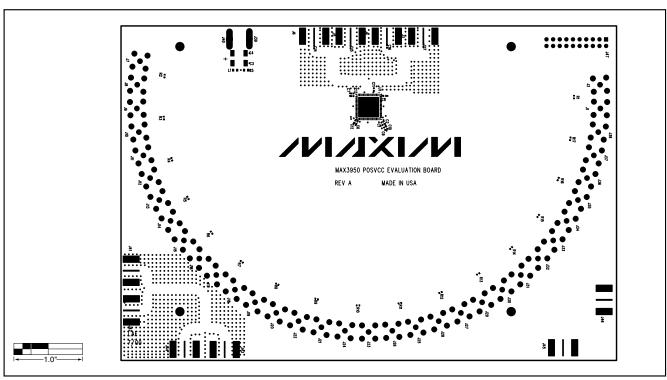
MAX3950 EV Kit Component Placement Guide—Component Side
